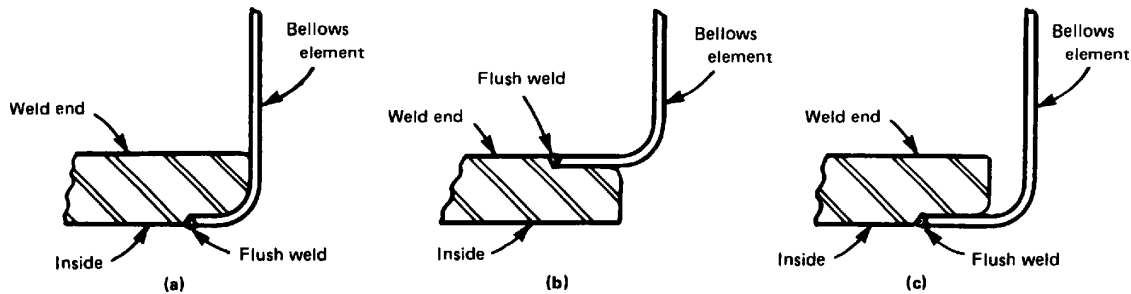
(c)-1 BELLOWS ATTACHMENT WELDS
